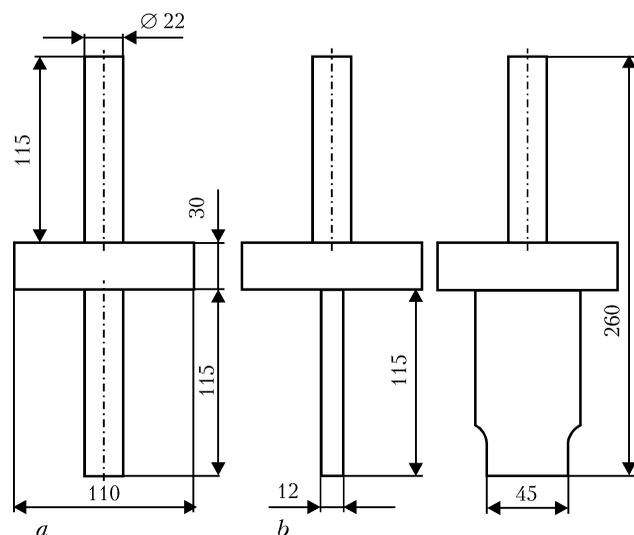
Drawing of mock-up welded joint of stud for fastening of BFBD slabs to upper flange of T-girder with cylindrical (a) and prismatic (b) gripping parts (first series of specimens)
